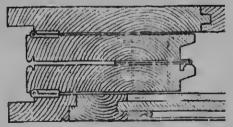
Part Horizontal Section of Collapsible Cupboard (Folded).
